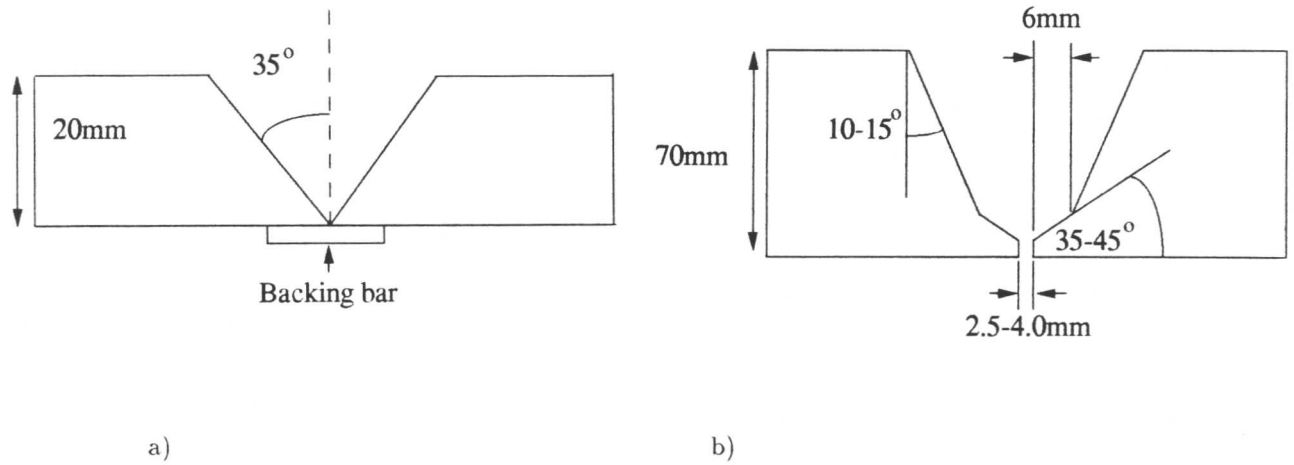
a) Weld design for the mild steel/1CrMo and mild steel/2 $\frac{1}{4}$ CrMo joints b) weld design for 2 $\frac{1}{4}$ CrMo/9CrMo and 2 $\frac{1}{4}$ CrMo/12CrMo joints.
